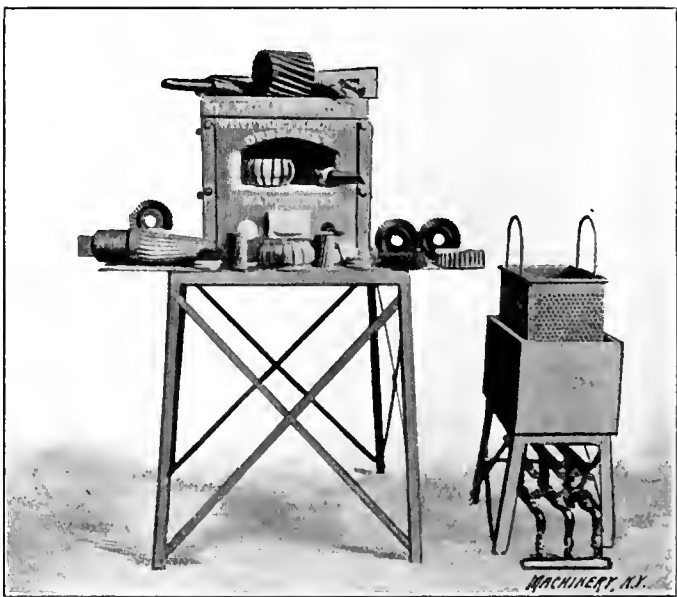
Muffle Furnace for Hardening Milling Cutters made of High-speed Steel; also Tank and Dipping Cage for Tempering them in Oil.
